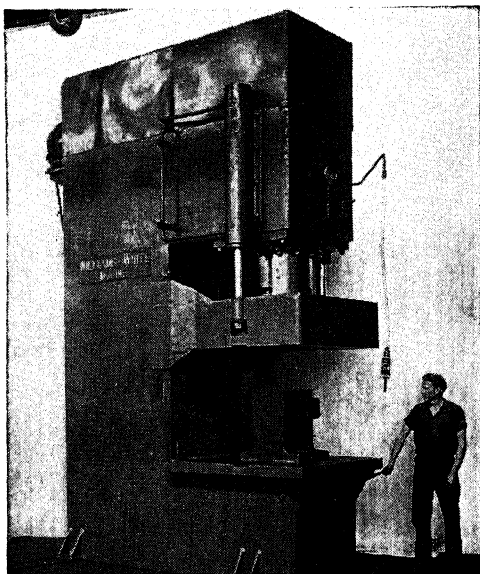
Frame and other members of this 500-ton hydraulic bending or crimping press are of welded construction for high strength, rigidity and light weight.
